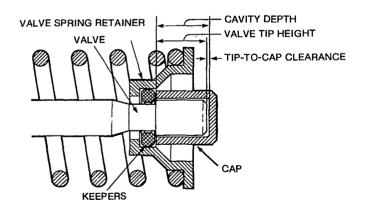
MEASURING VALVE TIP-TO-CAP CLEARANCE
